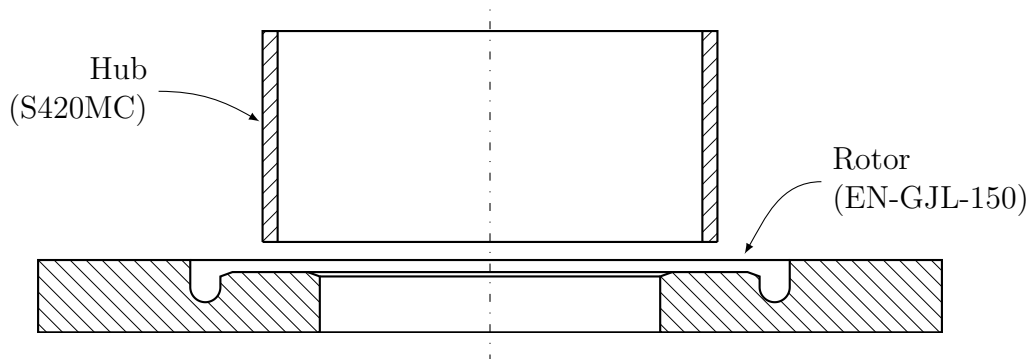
Concept drawing for a RFW brake disc combining a thin-walled hub and a massive rotor
